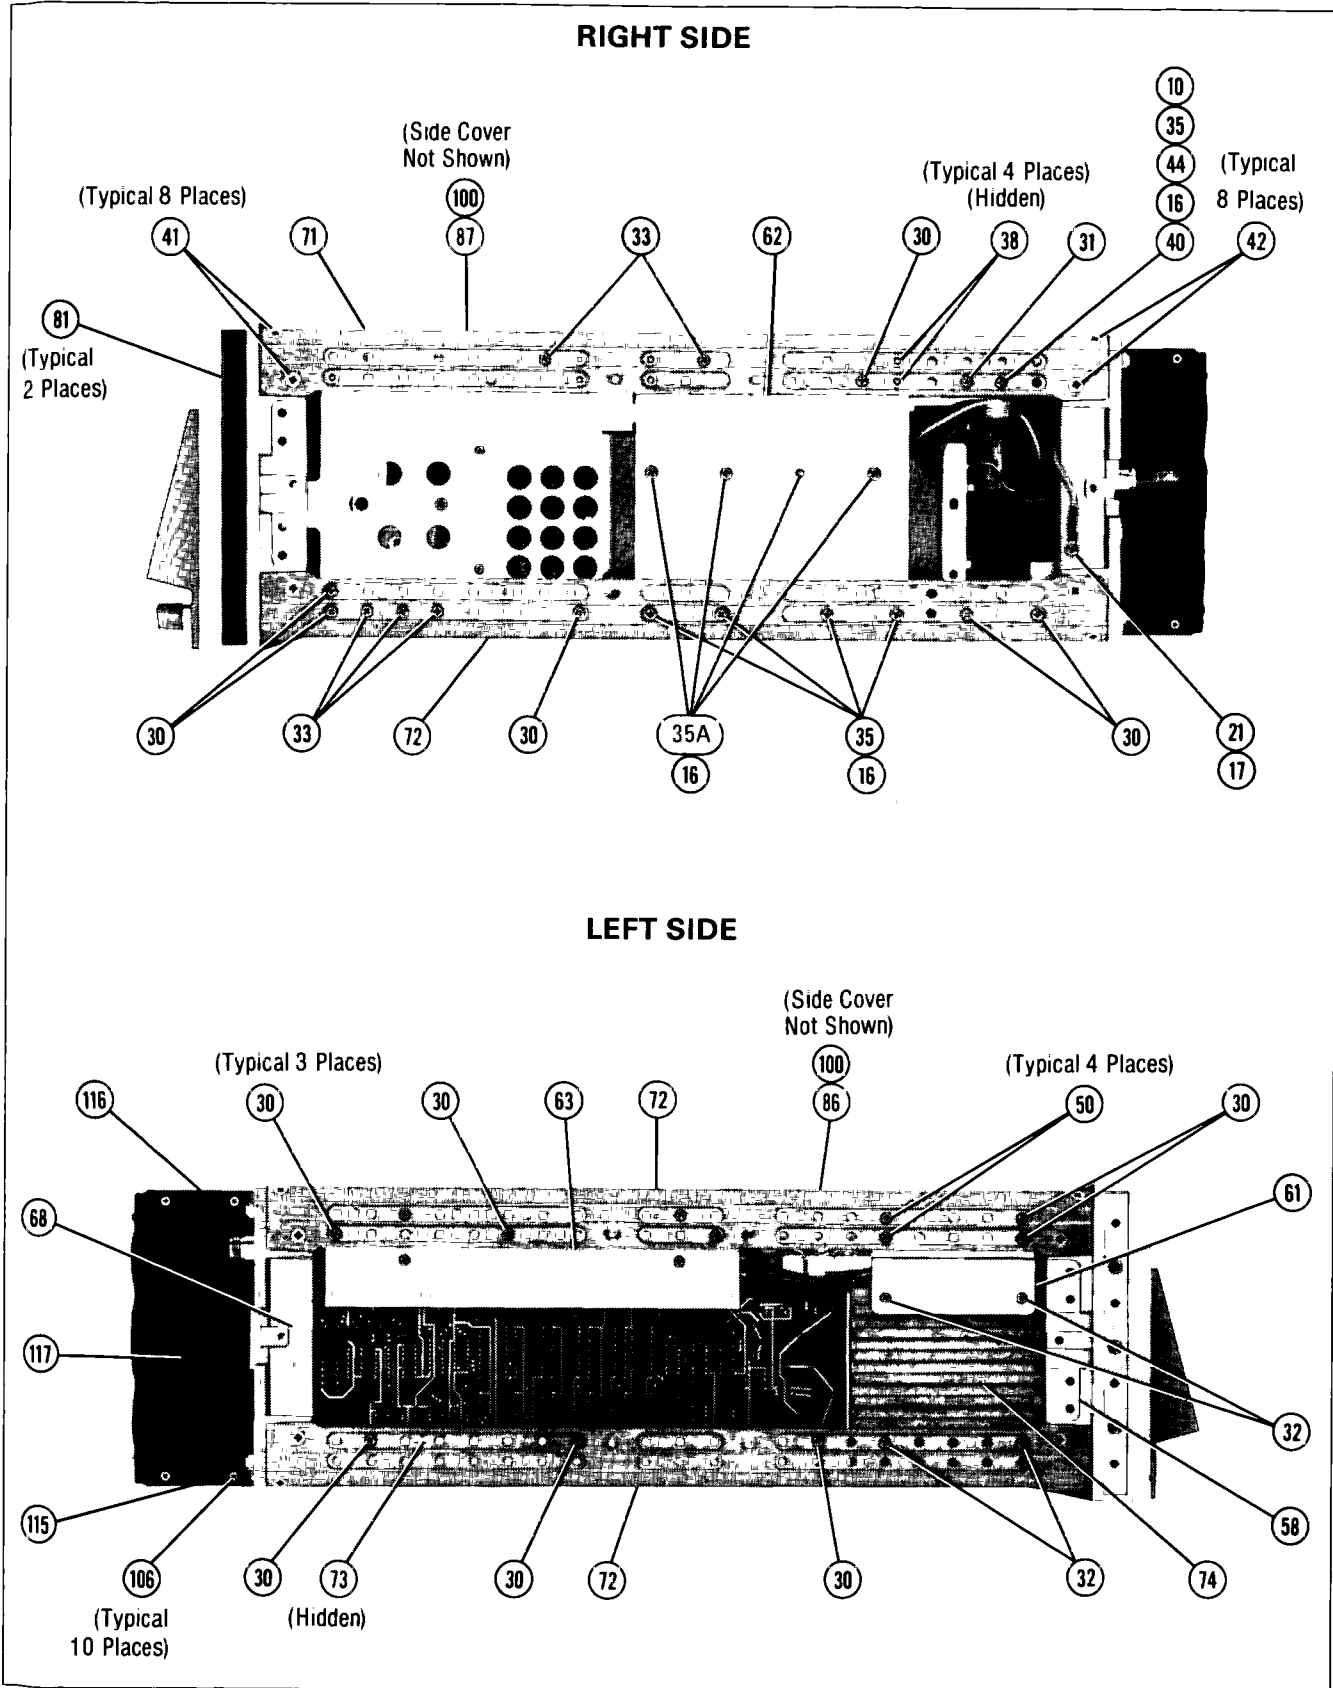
Miscellaneous Mechanical & Chassis Parts (6 of 6)
